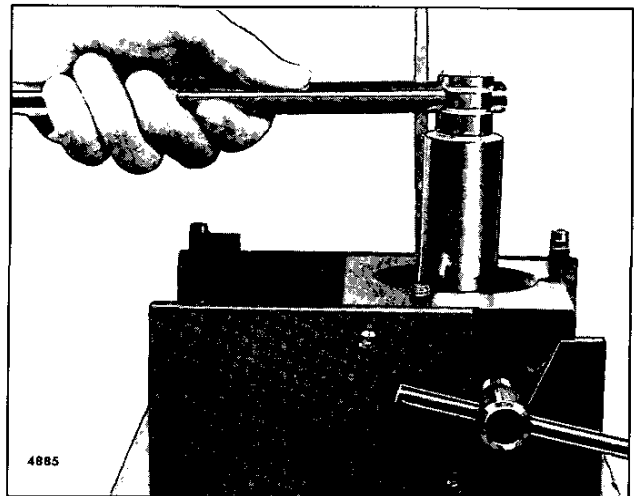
Removing Injector Nut Using Tool J 4983-01
